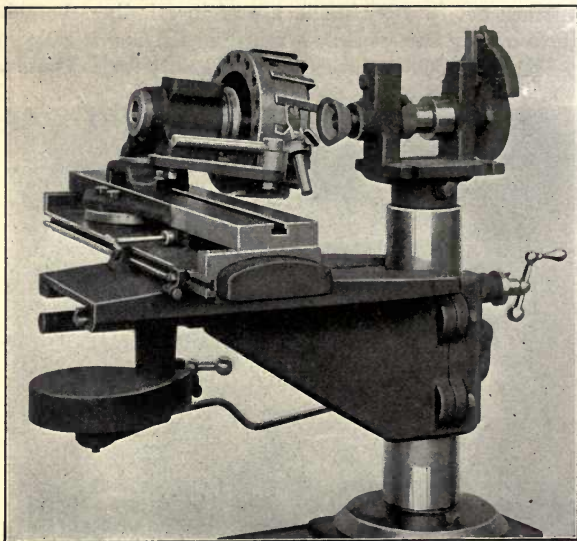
Grinding a large inserted-tooth milling cutter on a Cincinnati grinder.
